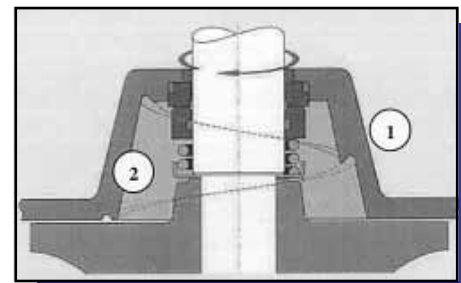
Solids Transported Out of Seal Chamber Environment along Helical Groove in Cyclone Seal Chamber.
